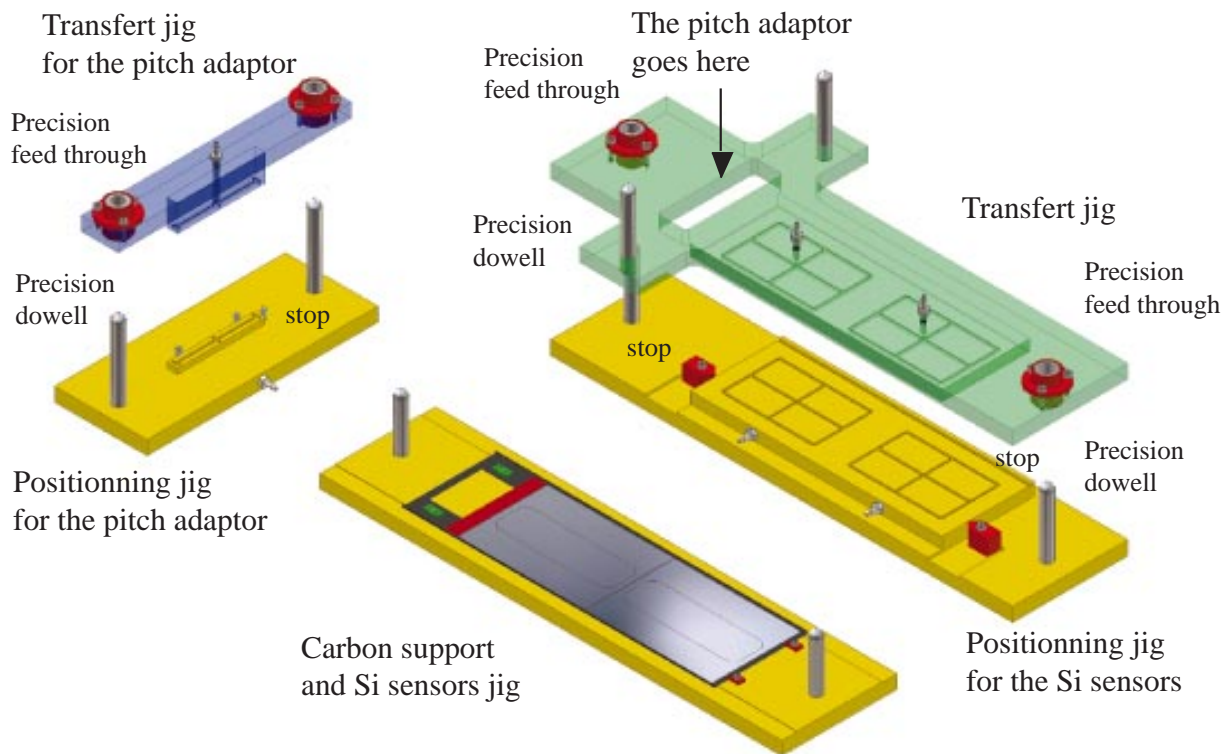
Drawing of the positioning and transfer jigs for the sensors and the pitch adaptor. The micrometric stops are not shown.
